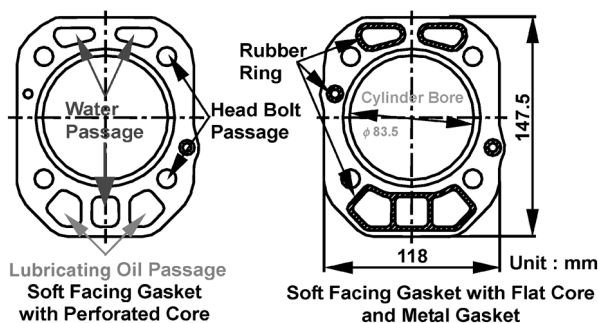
Shape and Dimension of Test Cylinder Head Gaskets
